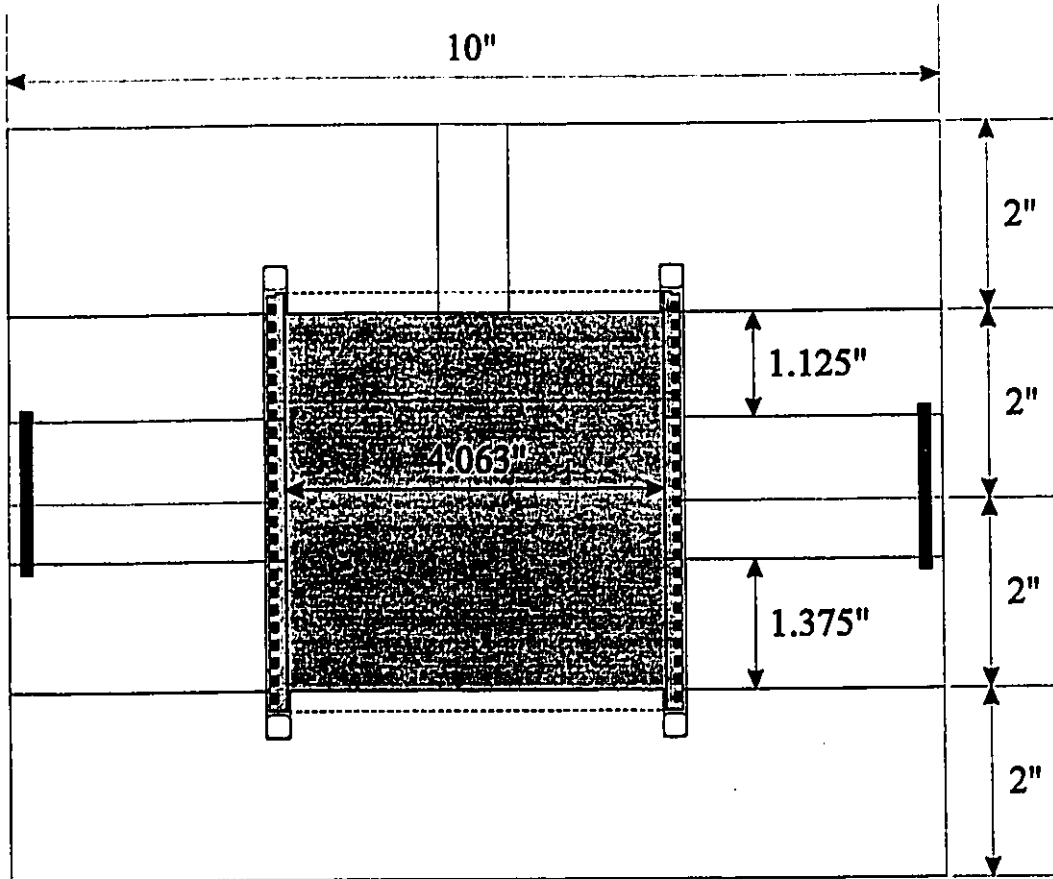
Furnace components and dimensions. Dimensions shown are exact specifications.
